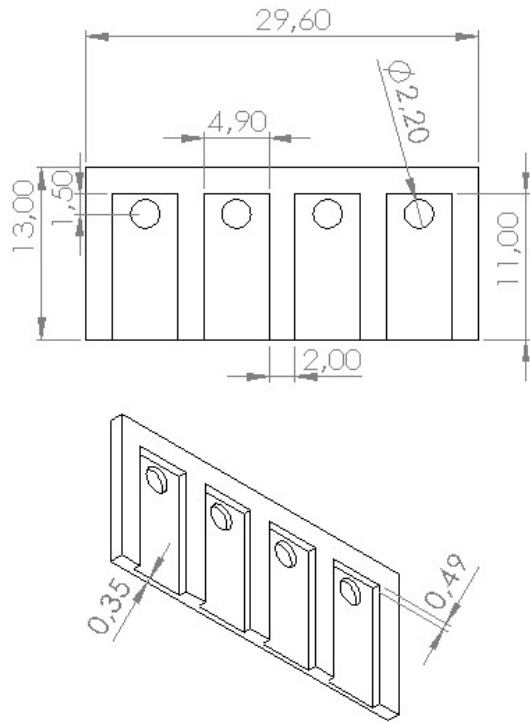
Technical drawing of the 3D-printed gasket used to integrate four separated Au/PtB electrodes.
